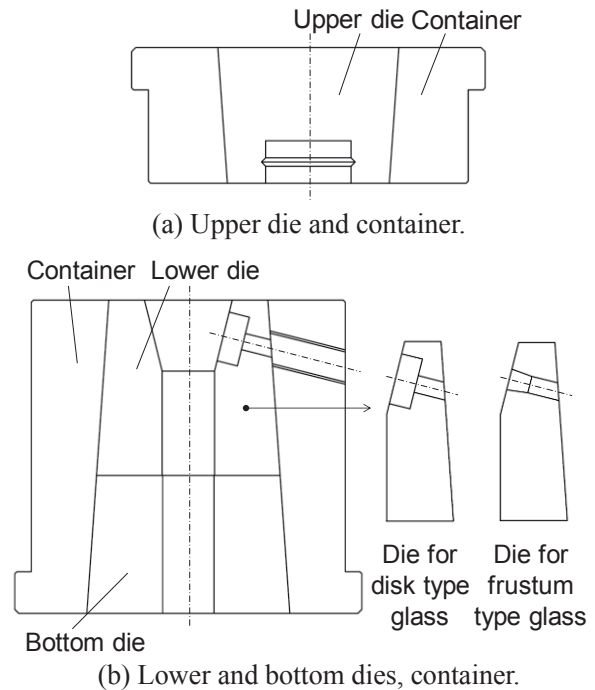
Dies for in-situ observation of die-workpiece interface in cold extrusion type forging.
